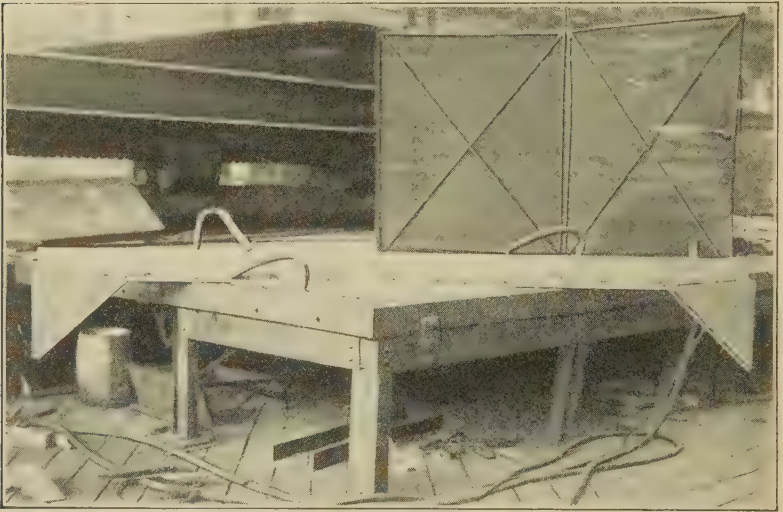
Stiffener with type-2 brackets (used in bulkheads A, B, C, D, and F) under construction.
